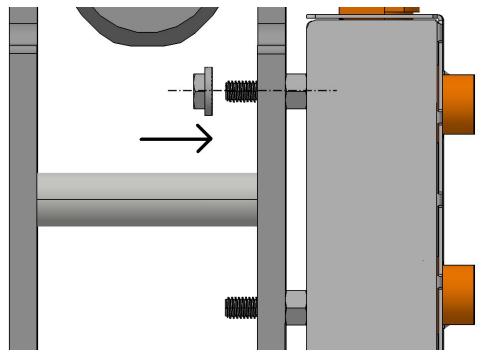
Insert the nuts to fix the no-solder board onto the support plate
